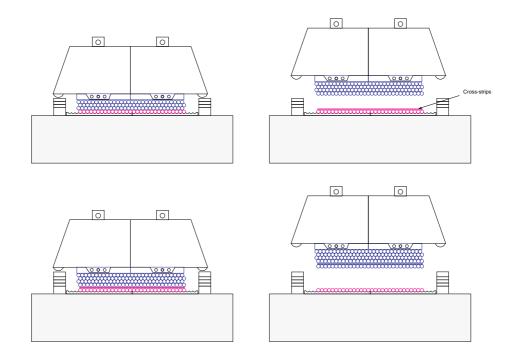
Schematic view of the chamber assembly. Shown are the glueing of the 5<sup>th</sup> and 6<sup>th</sup> layers.
